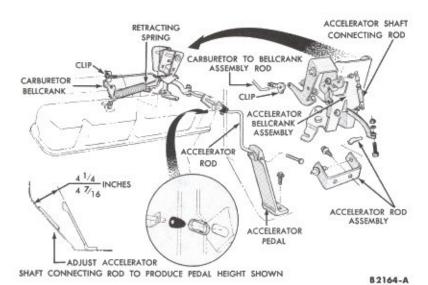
Throttle Linkage Adjustment-8-Cylinder
